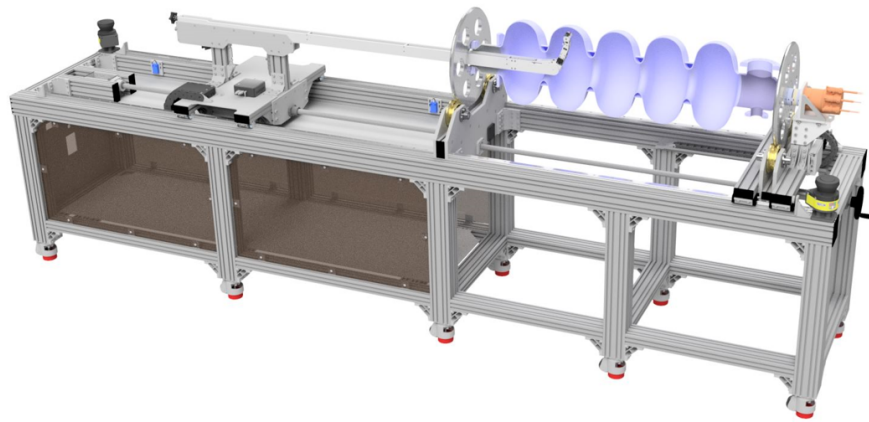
Automated Robotic Inspection System (ARIS) while inspecting an RF cavity. (Retrieved from [8]).
